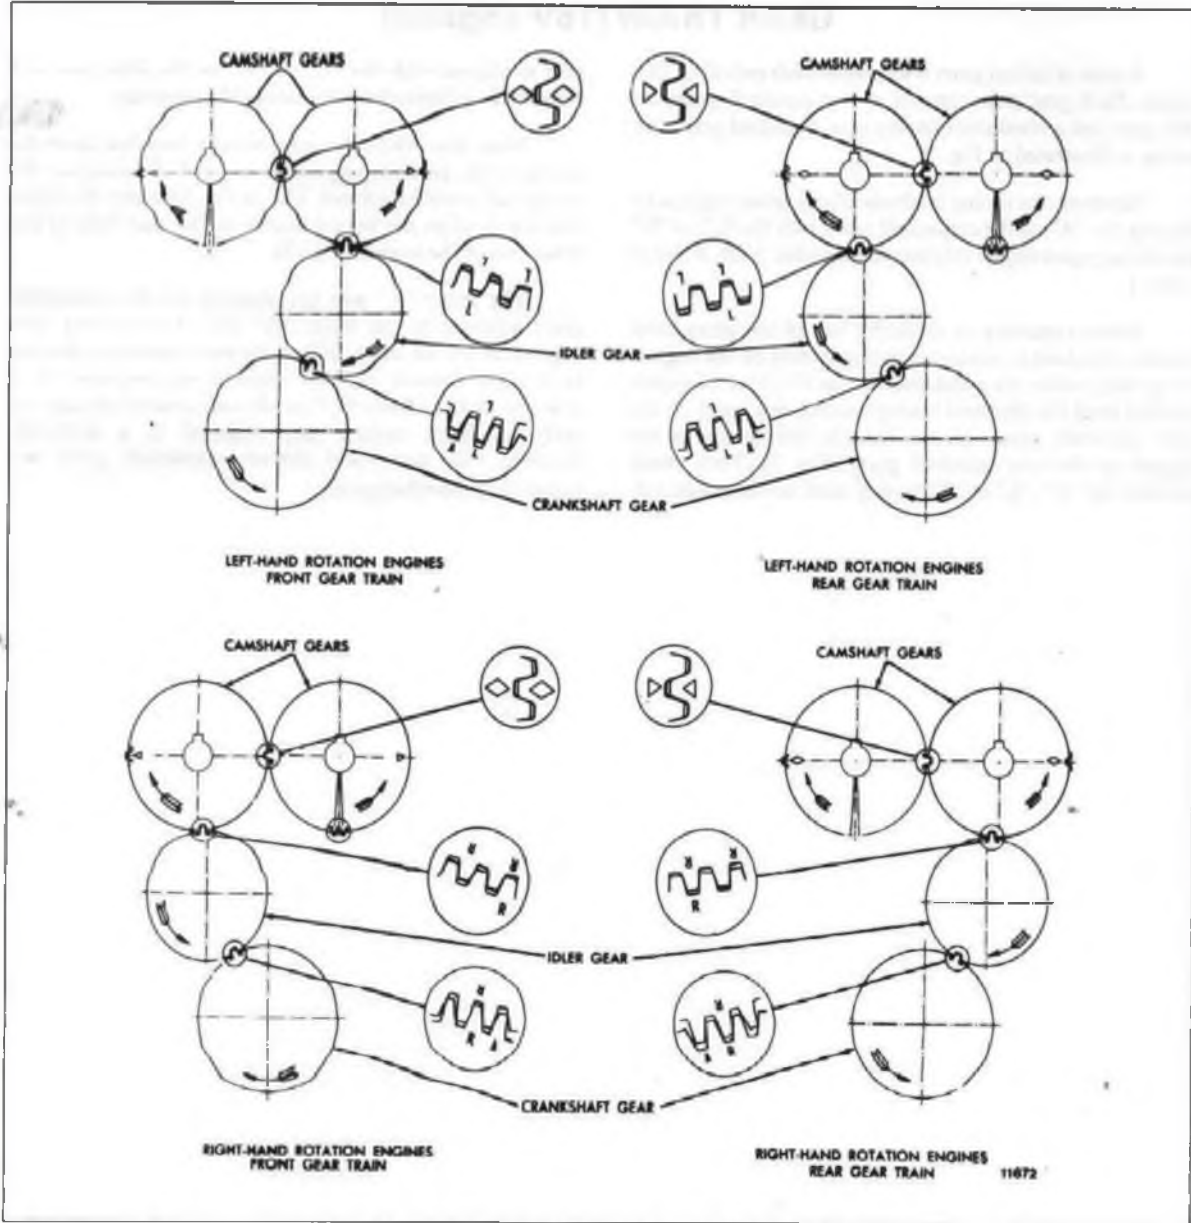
Gear Train and Timing Marks for 16V Engine
